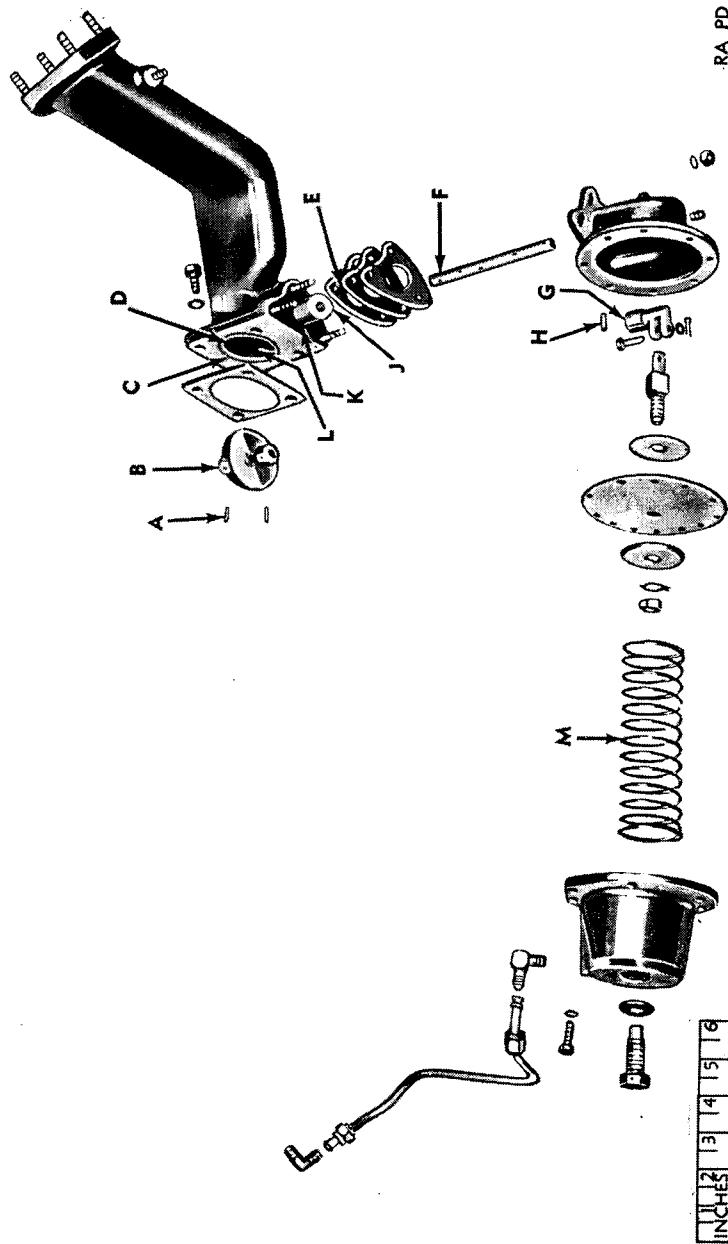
Repair and rebuild standard points of measurement for hotspot outlet housing and vacuum heat control lever housing.
